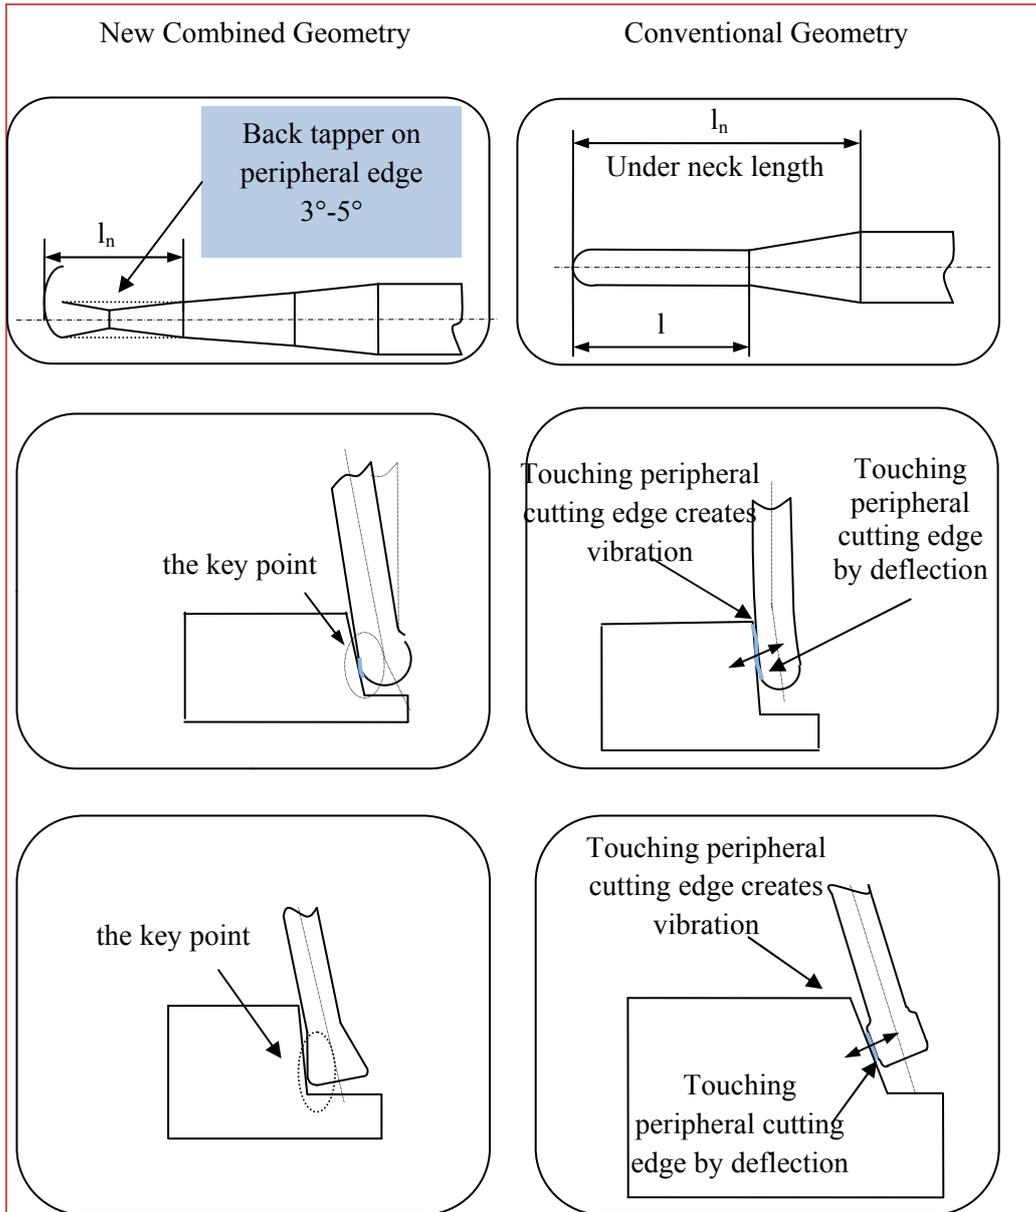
Cutting tool with tapered shape and reduced diameter at the tool peripheral edge (adapted from [40]).
